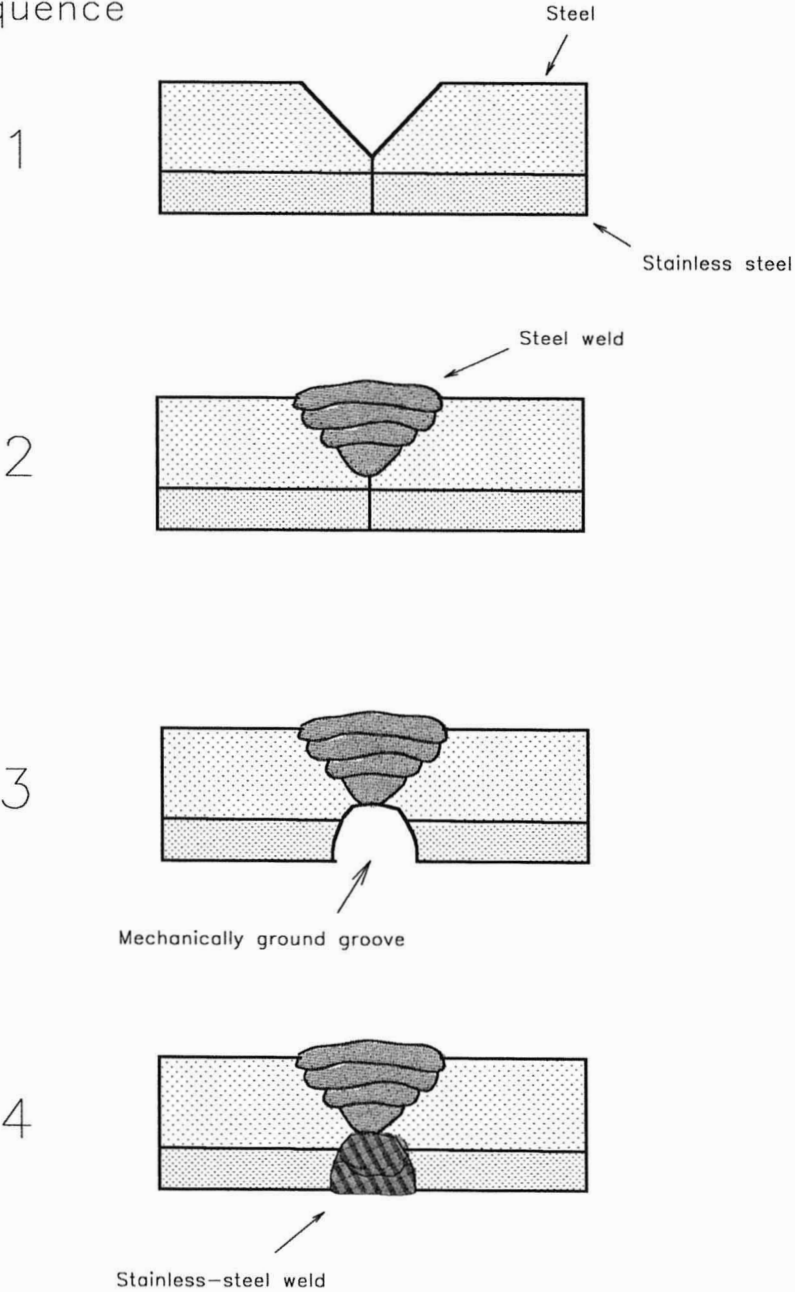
Welding technique to avoid corrosion problems when joining two metals.
